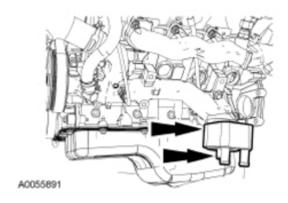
Locating Oil Cooler Courtesy of FORD MOTOR CO.
